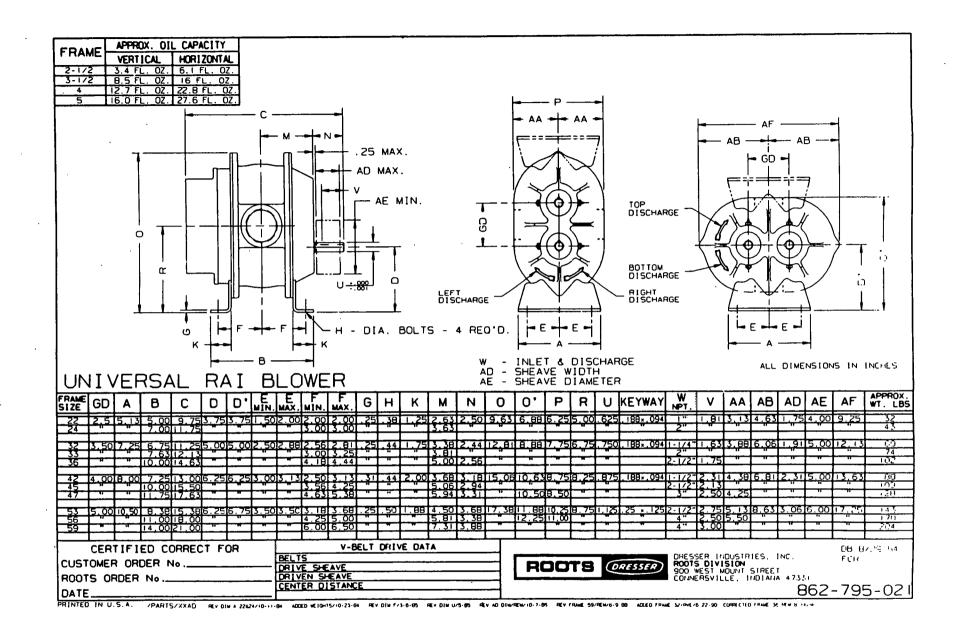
Dimensional Assembly of UNIVERSAL RAI[®] Blower (2¹/₂^{''}-5'')
